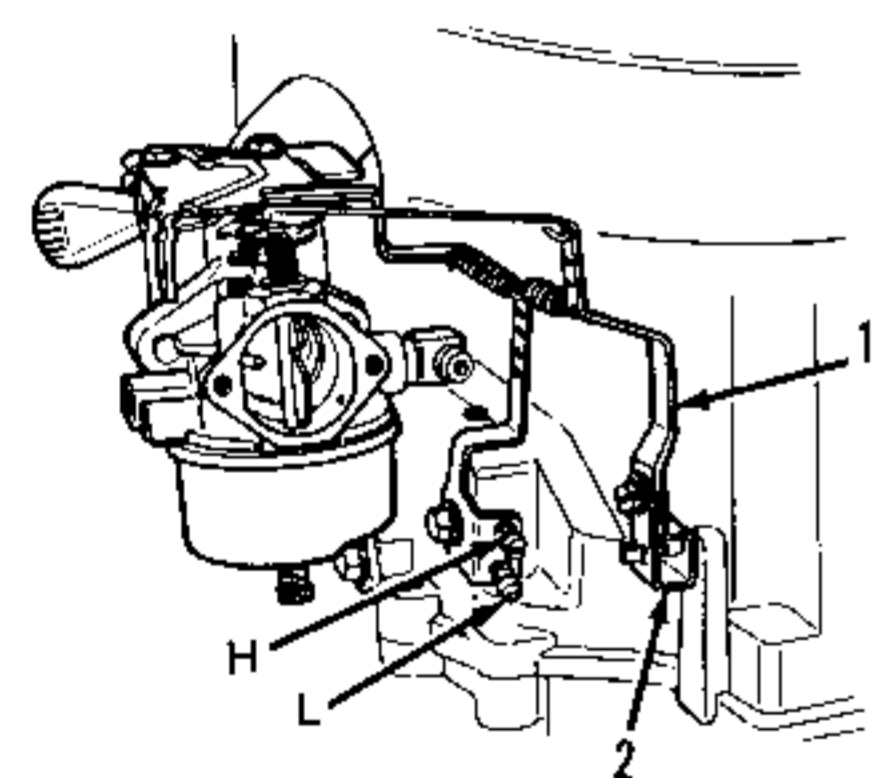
Drawing of governor external linkage typical of engines equipped with governor override system. Refer to text for adjustment procedure.
